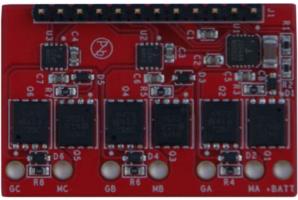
HIP2103-4DEM02Z TOP VIEW
